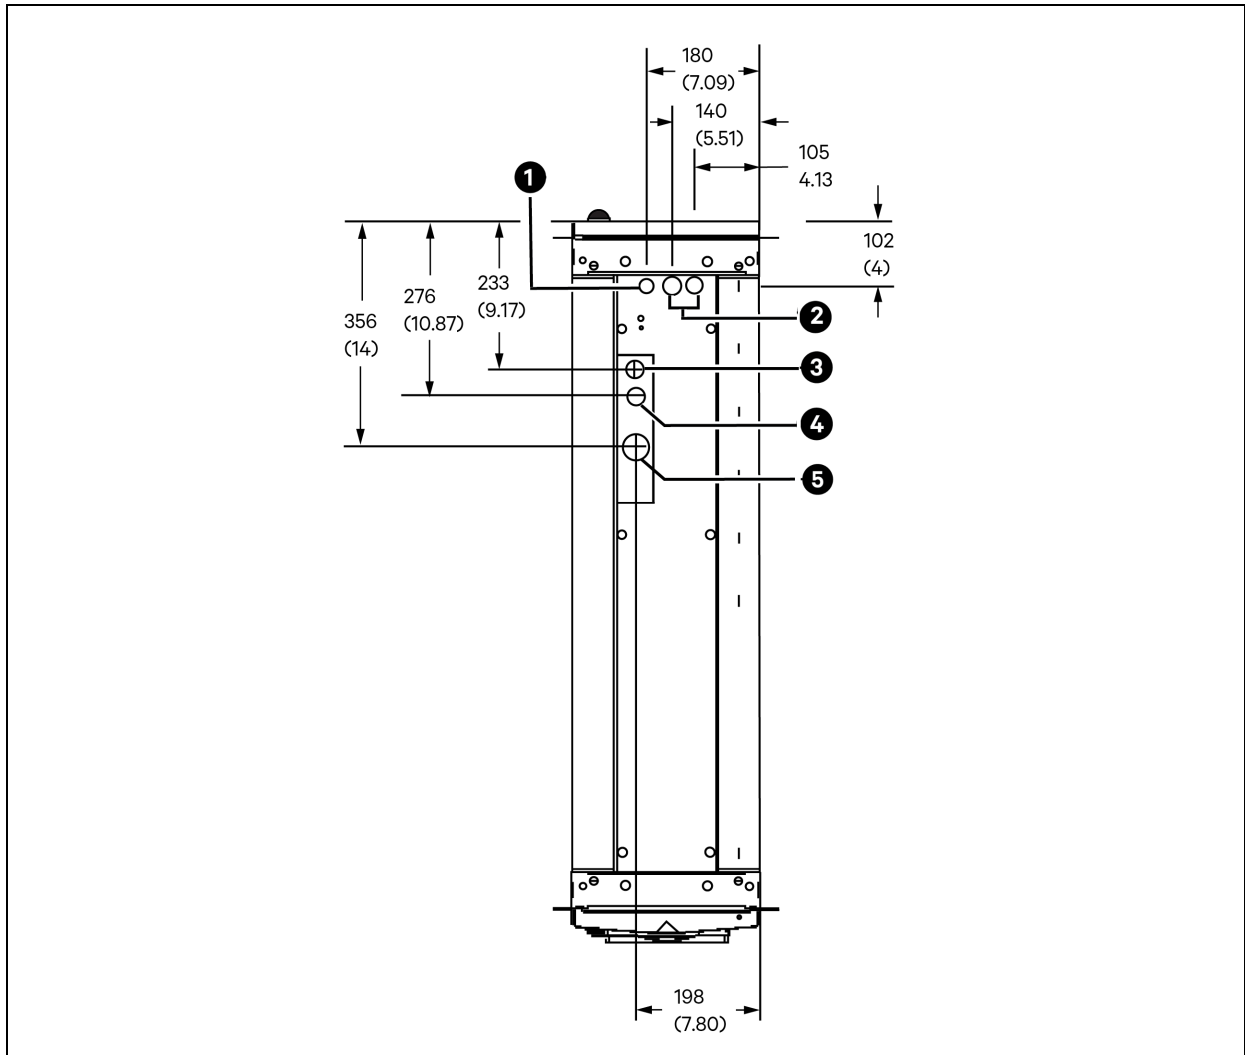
Pipe and Cable Access Locations and Dimensions on Base Plate (Unit: mm (in))
